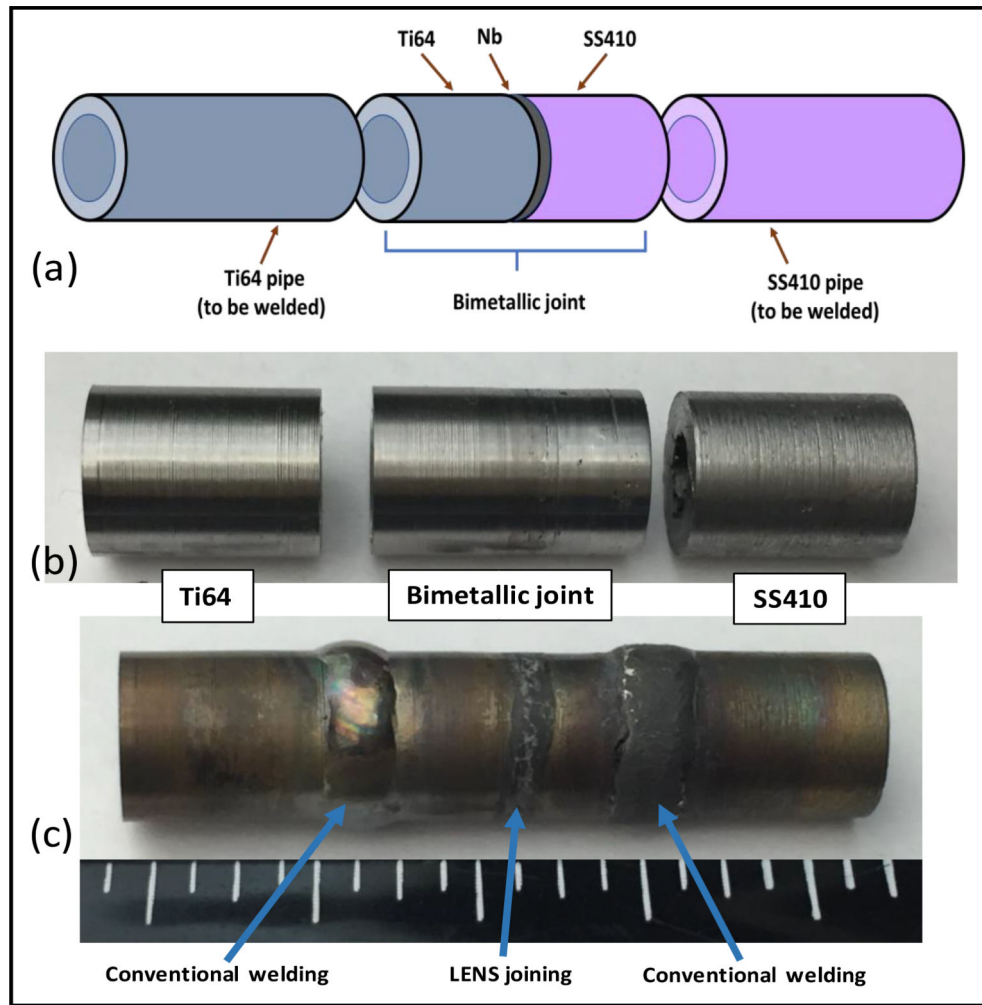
Bimetallic joint application. (a) Concept model for joining dissimilar materials, (b) Unwelded parts to bimetallic joint and (c) Welded assembly.
